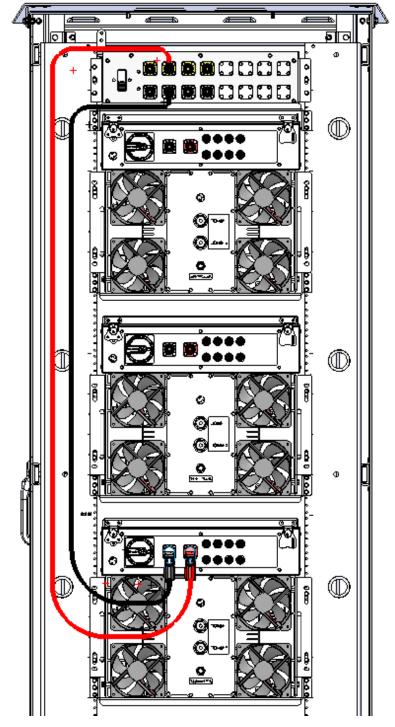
SURLOK CABLING ROUTED TO PRIMARY (INPUT) FEED #3
